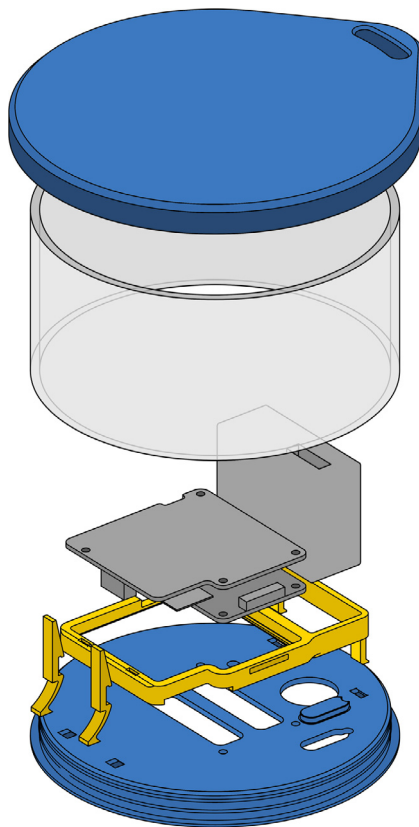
Smart Citizen V2.1 enclosure. Exploded view.
